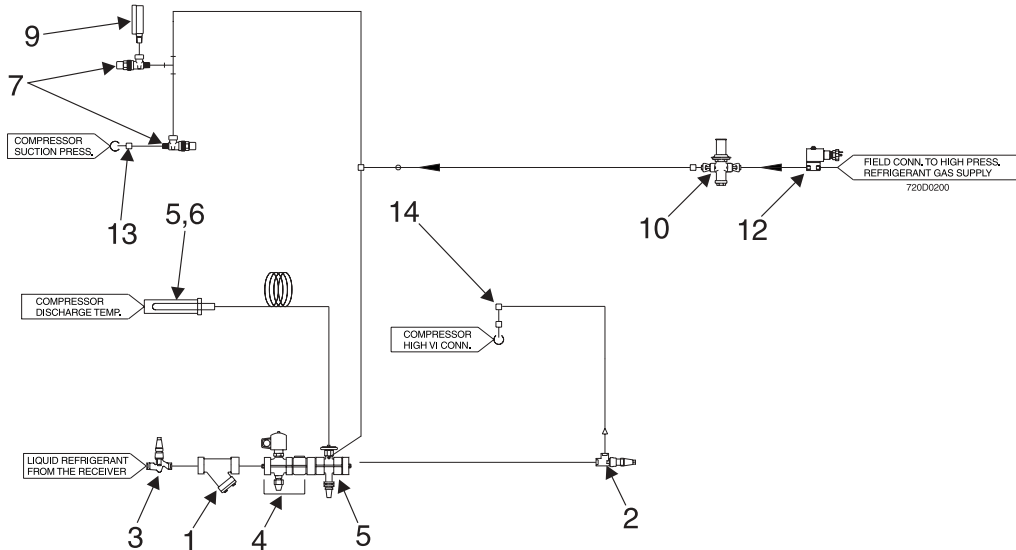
720D0200 Liquid Injection, Booster, Socket Weld
